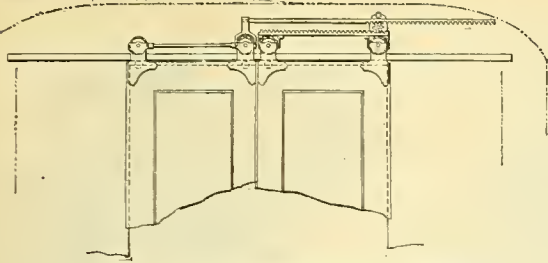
DOUBLE SLIDING DOOR FIXTURE.
